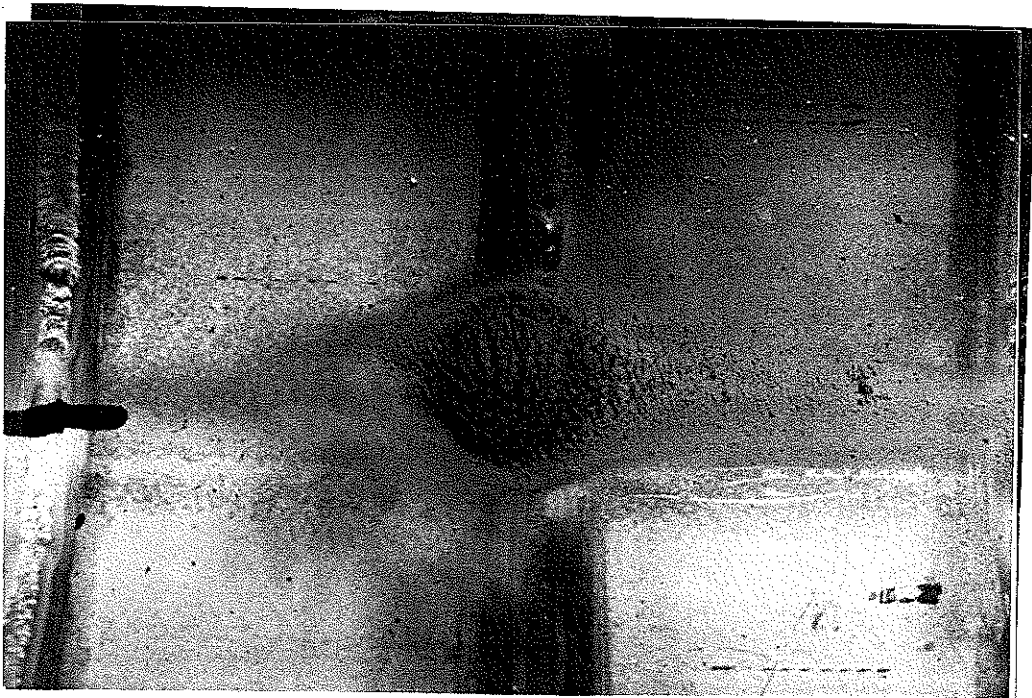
Mound on weld after exposure for 2 weeks.
